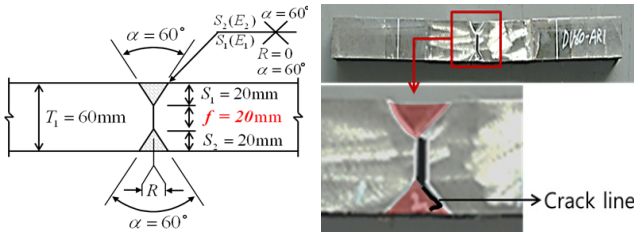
PJP weld details and fractured specimen - weld rod A and double V-groove 60° used
